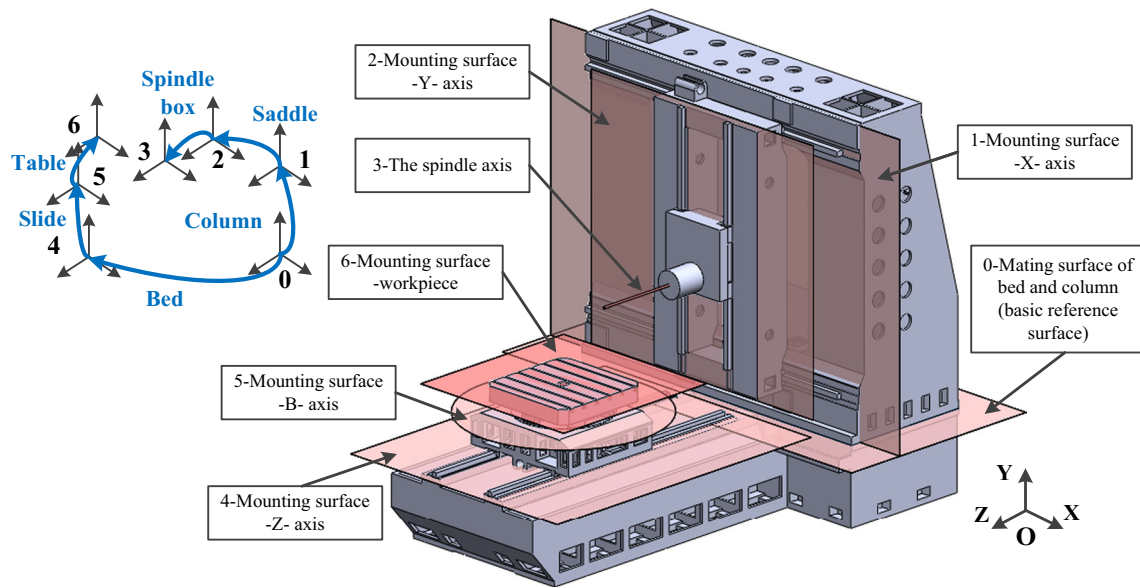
KCs of horizontal machining center in tolerance design
